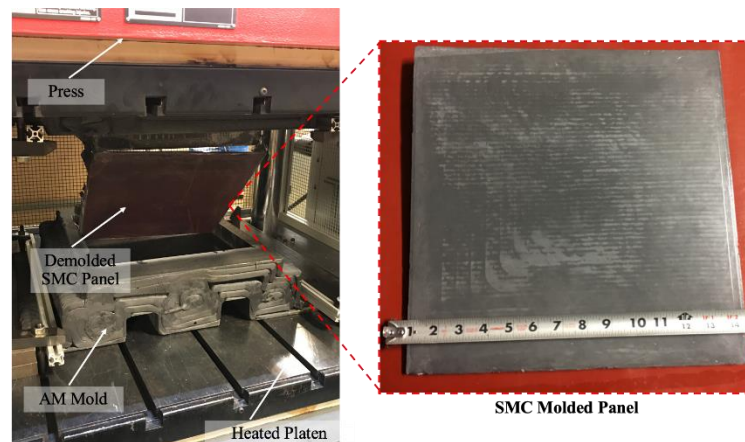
Compression molding process of the SMC panel using the AM flat mold
